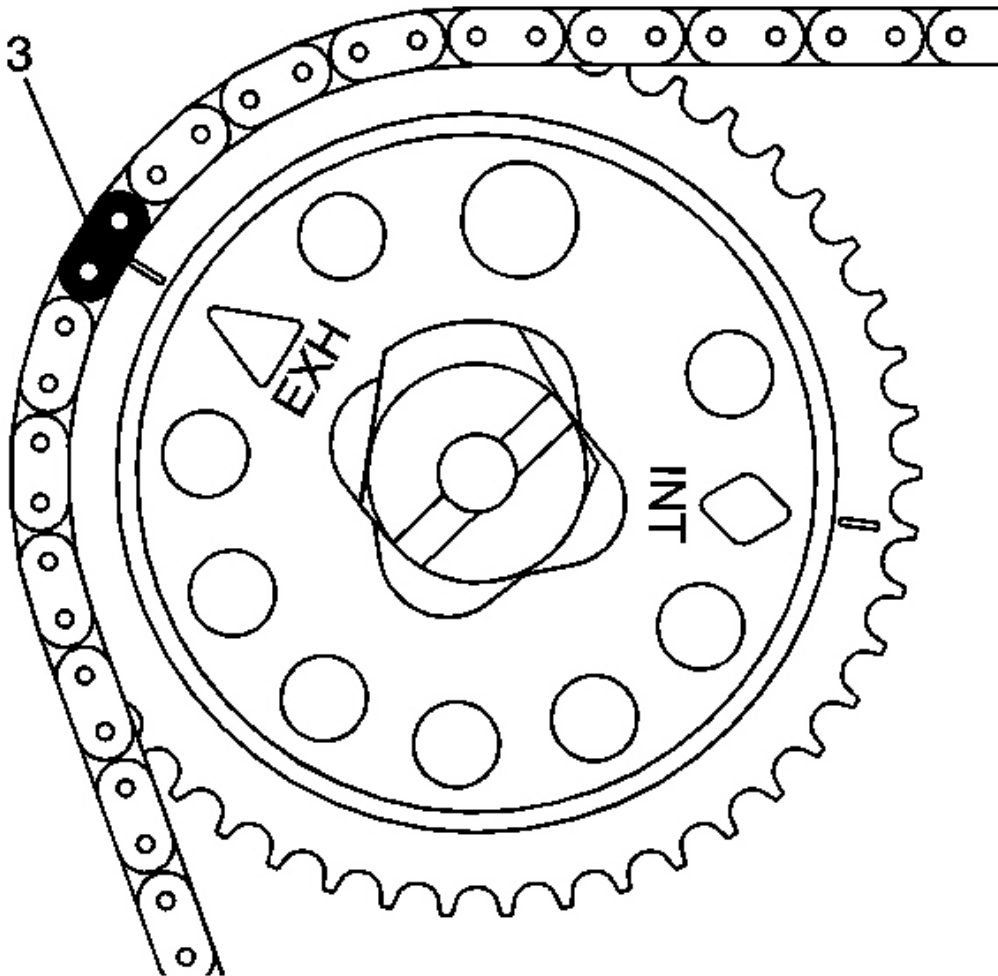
Aligning Timing Chain Link & Exhaust Timing Mark
